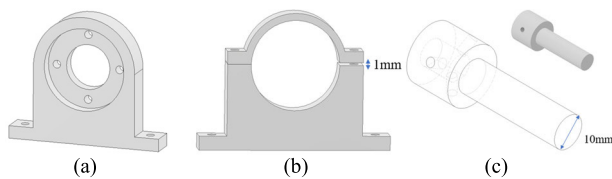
(a) Motor front seat; (b) Motor back seat; (c) Shaft sleeve.
